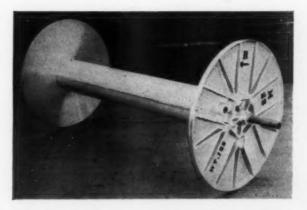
Magnesium section beam with cast and machined 28-in. flanges and 9-in. drum.
